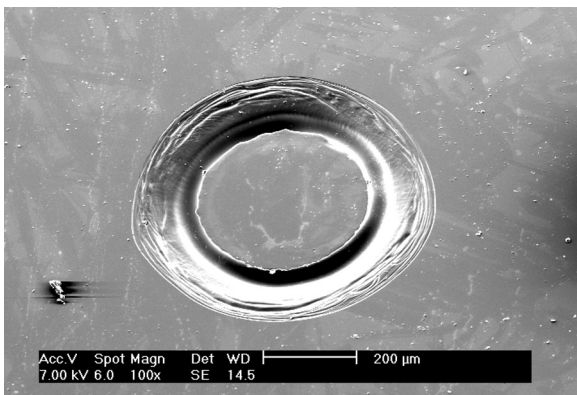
Crater created by a cylindrical tool electrode. Machined with 35 V electrode voltage and 2 s machining time.
